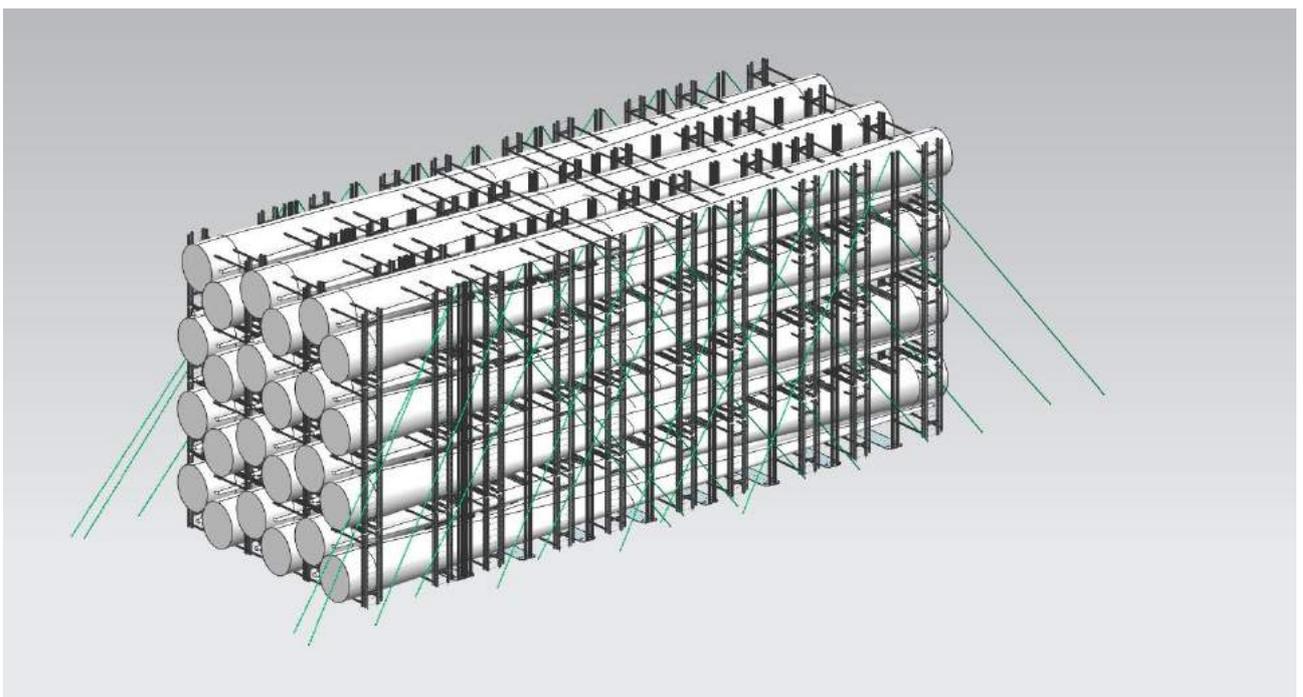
Optimum Arrangement of Rack and Cutting Tools for 3.6 MW blades
